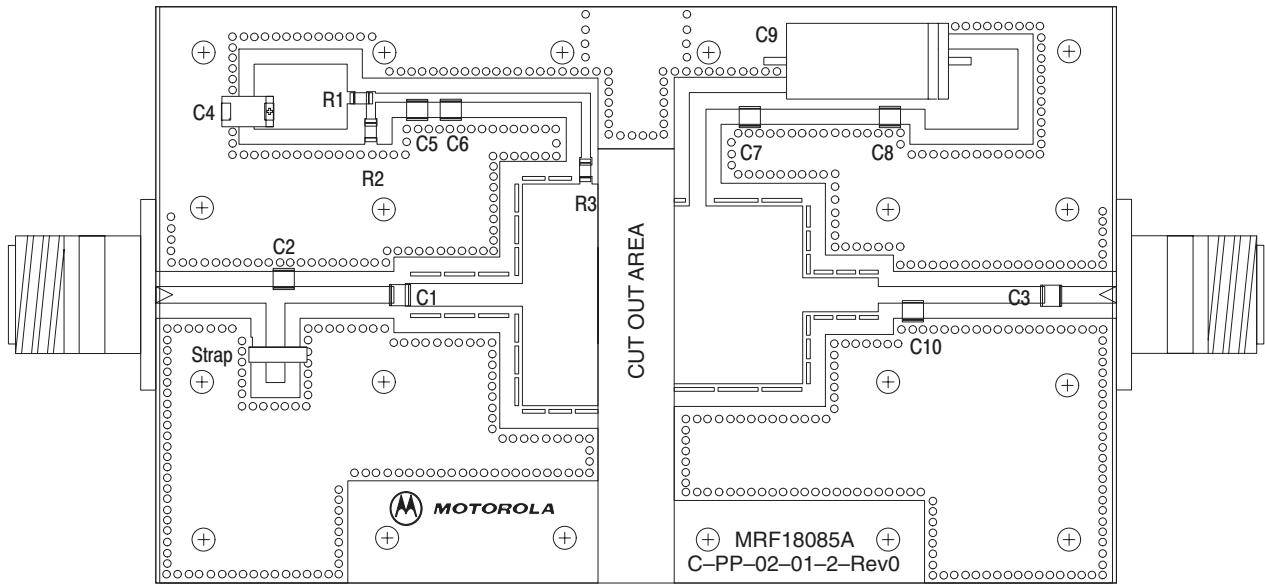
1.80 – 1.88 GHz Test Fixture Component Layout
